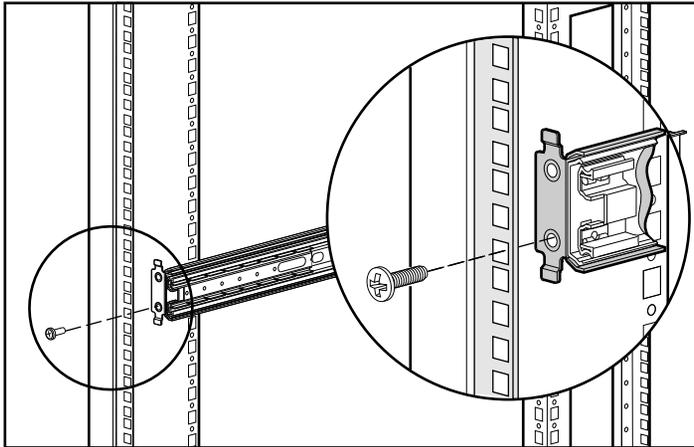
Attaching mounting bracket assembly to the front of the rack
